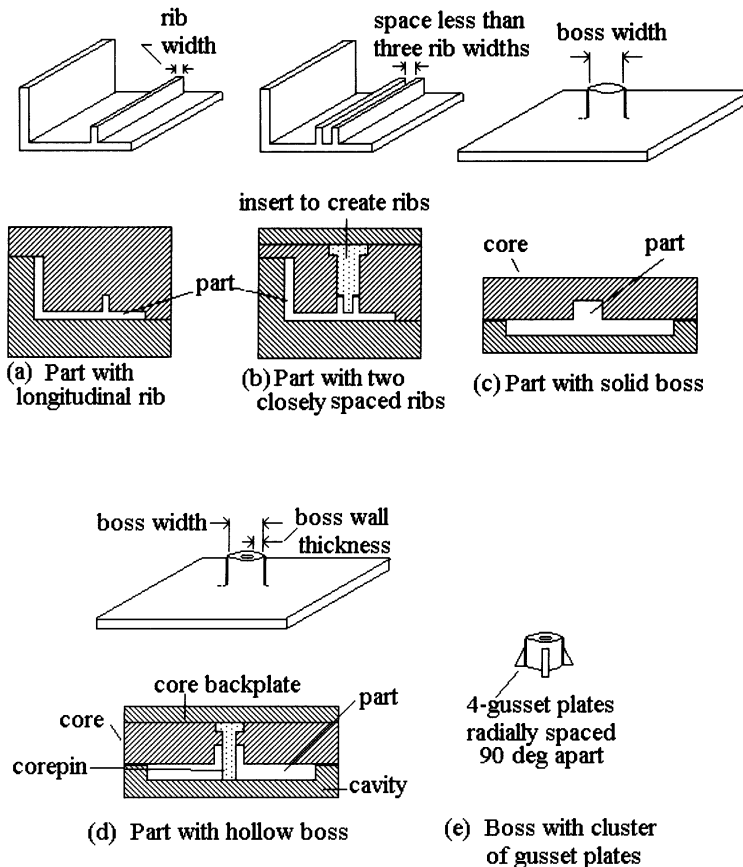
Example of parts with ribs and bosses and sectional views of the molds used to produce them.
